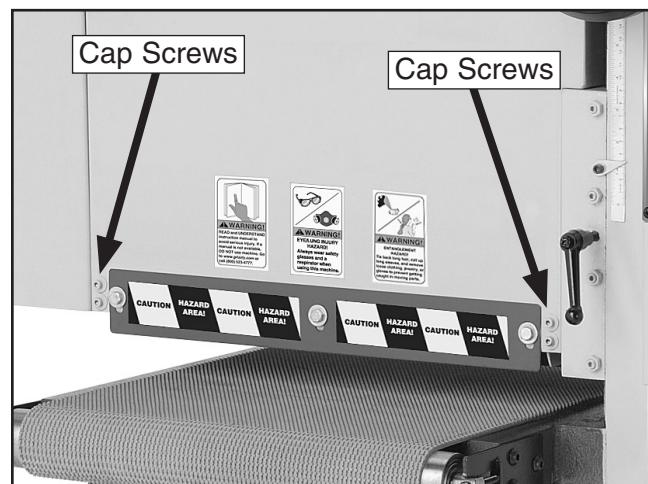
Pressure roller cap screws (front pressure roller cap screws shown)
